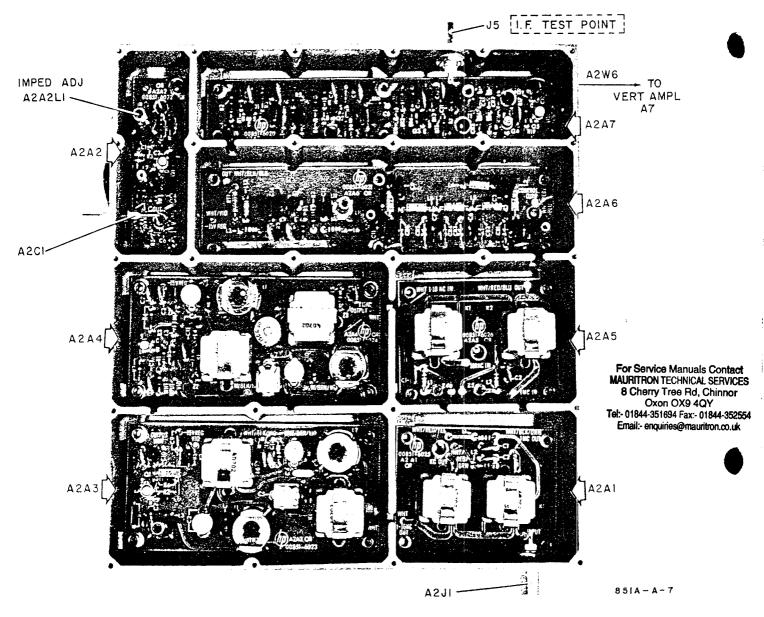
RF Circuit Assembly A2, Top Cover Removed
